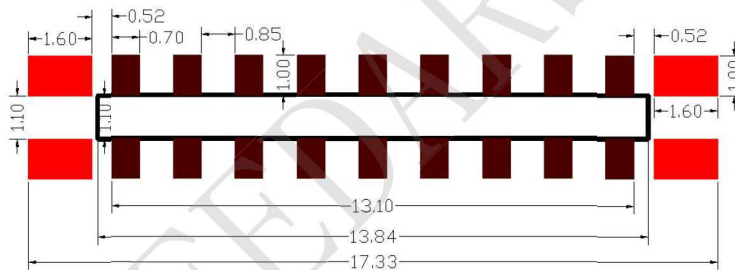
Plug-in PCB Land Pattern (Unit: mm)
